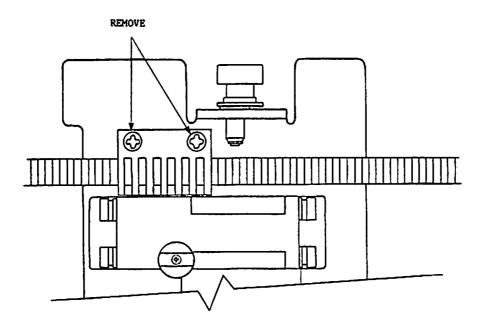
MAIN DRIVE BELT REMOVAL
